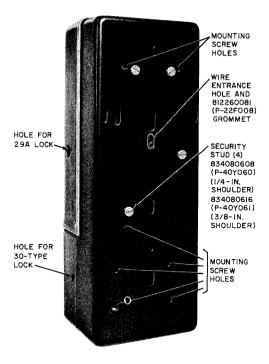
Location of Mounting Screw Holes and Security Studs in 1-Type Set
